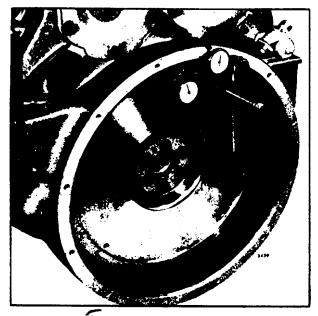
Checking Flywheel Housing Concentricity with Tool J 9737
